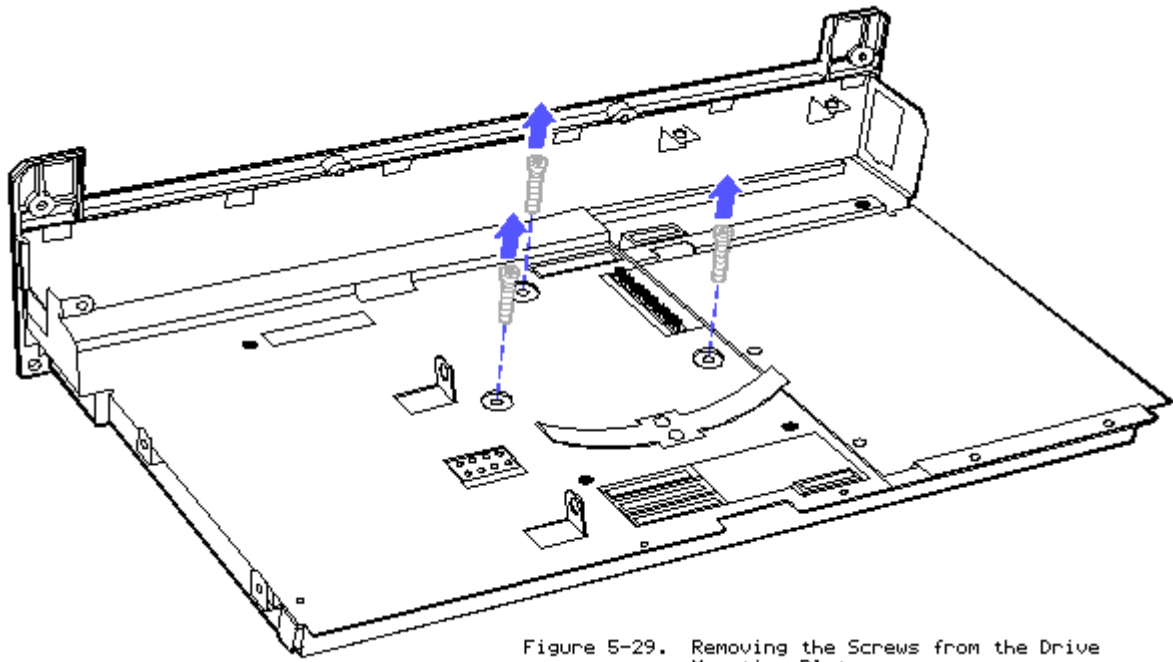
Removing the Screws from the Drive Mounting Plate
